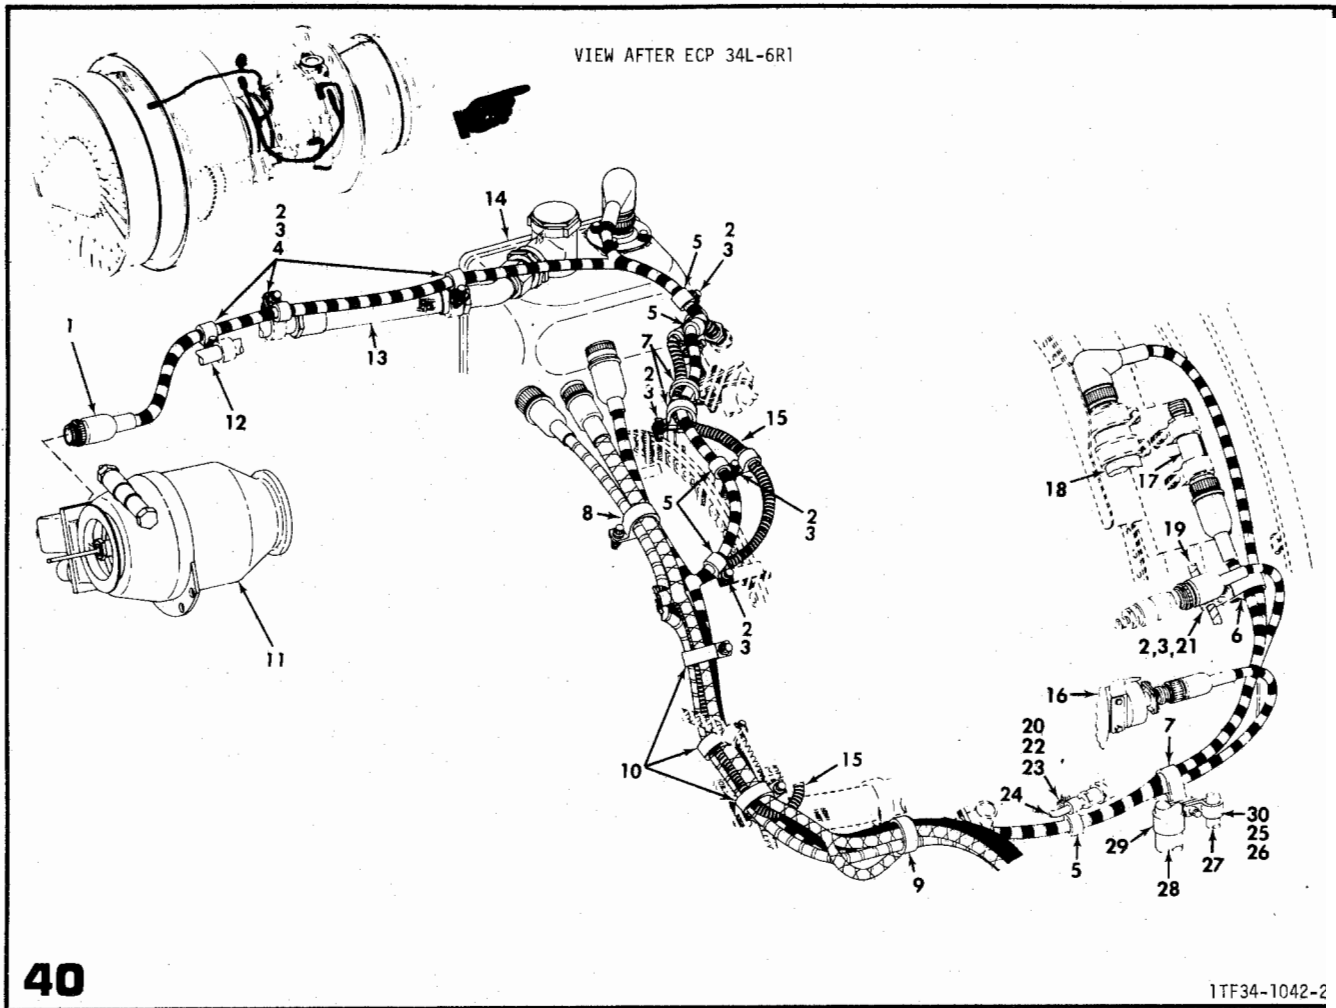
ANTI-ICING VALVE,OIL LEVEL SENSOR AND FUEL FILTER ELECTRICAL CABLE
